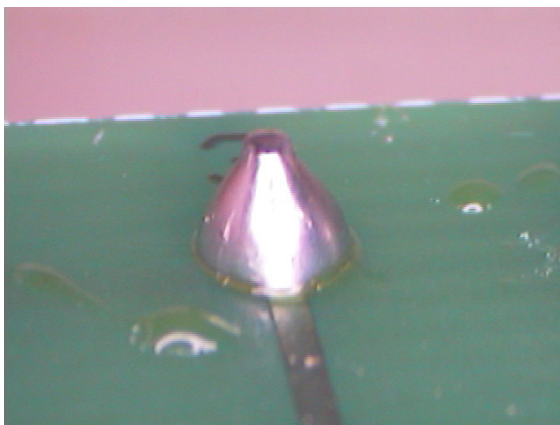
Example of excessive solder, seen from the soldered fillet side of the circuit board (60%tin-40% lead flux cored solder, joint B3).
